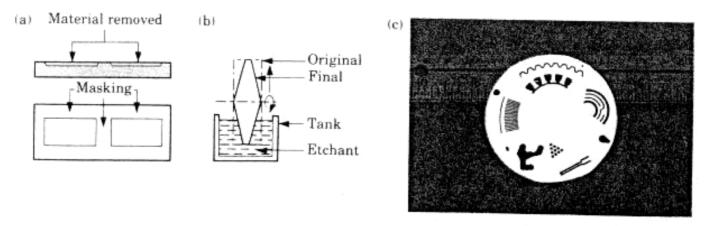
Examples of chemical machining. (a) Material removed from the surfaces of a plate to reduce its weight while maintaining stiffness. (b) A tapered disk. (c) An example of chemical machining (photochemical) on steel sheet 0.004 in. thick (0.1 mm). Note the fine detail and small size of holes produced. This part is 2 3/8 in. (60 mm) in diameter. Source: Newcut, Newark, NY.
